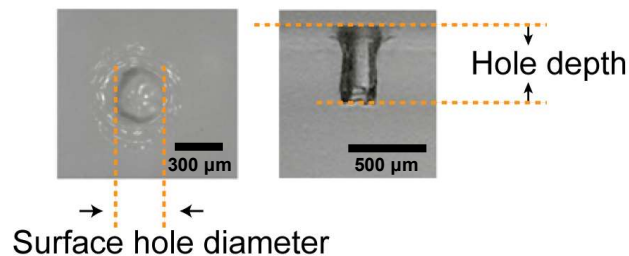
Image of a surface hole diameter and hole depth in a cylindrical hole.
